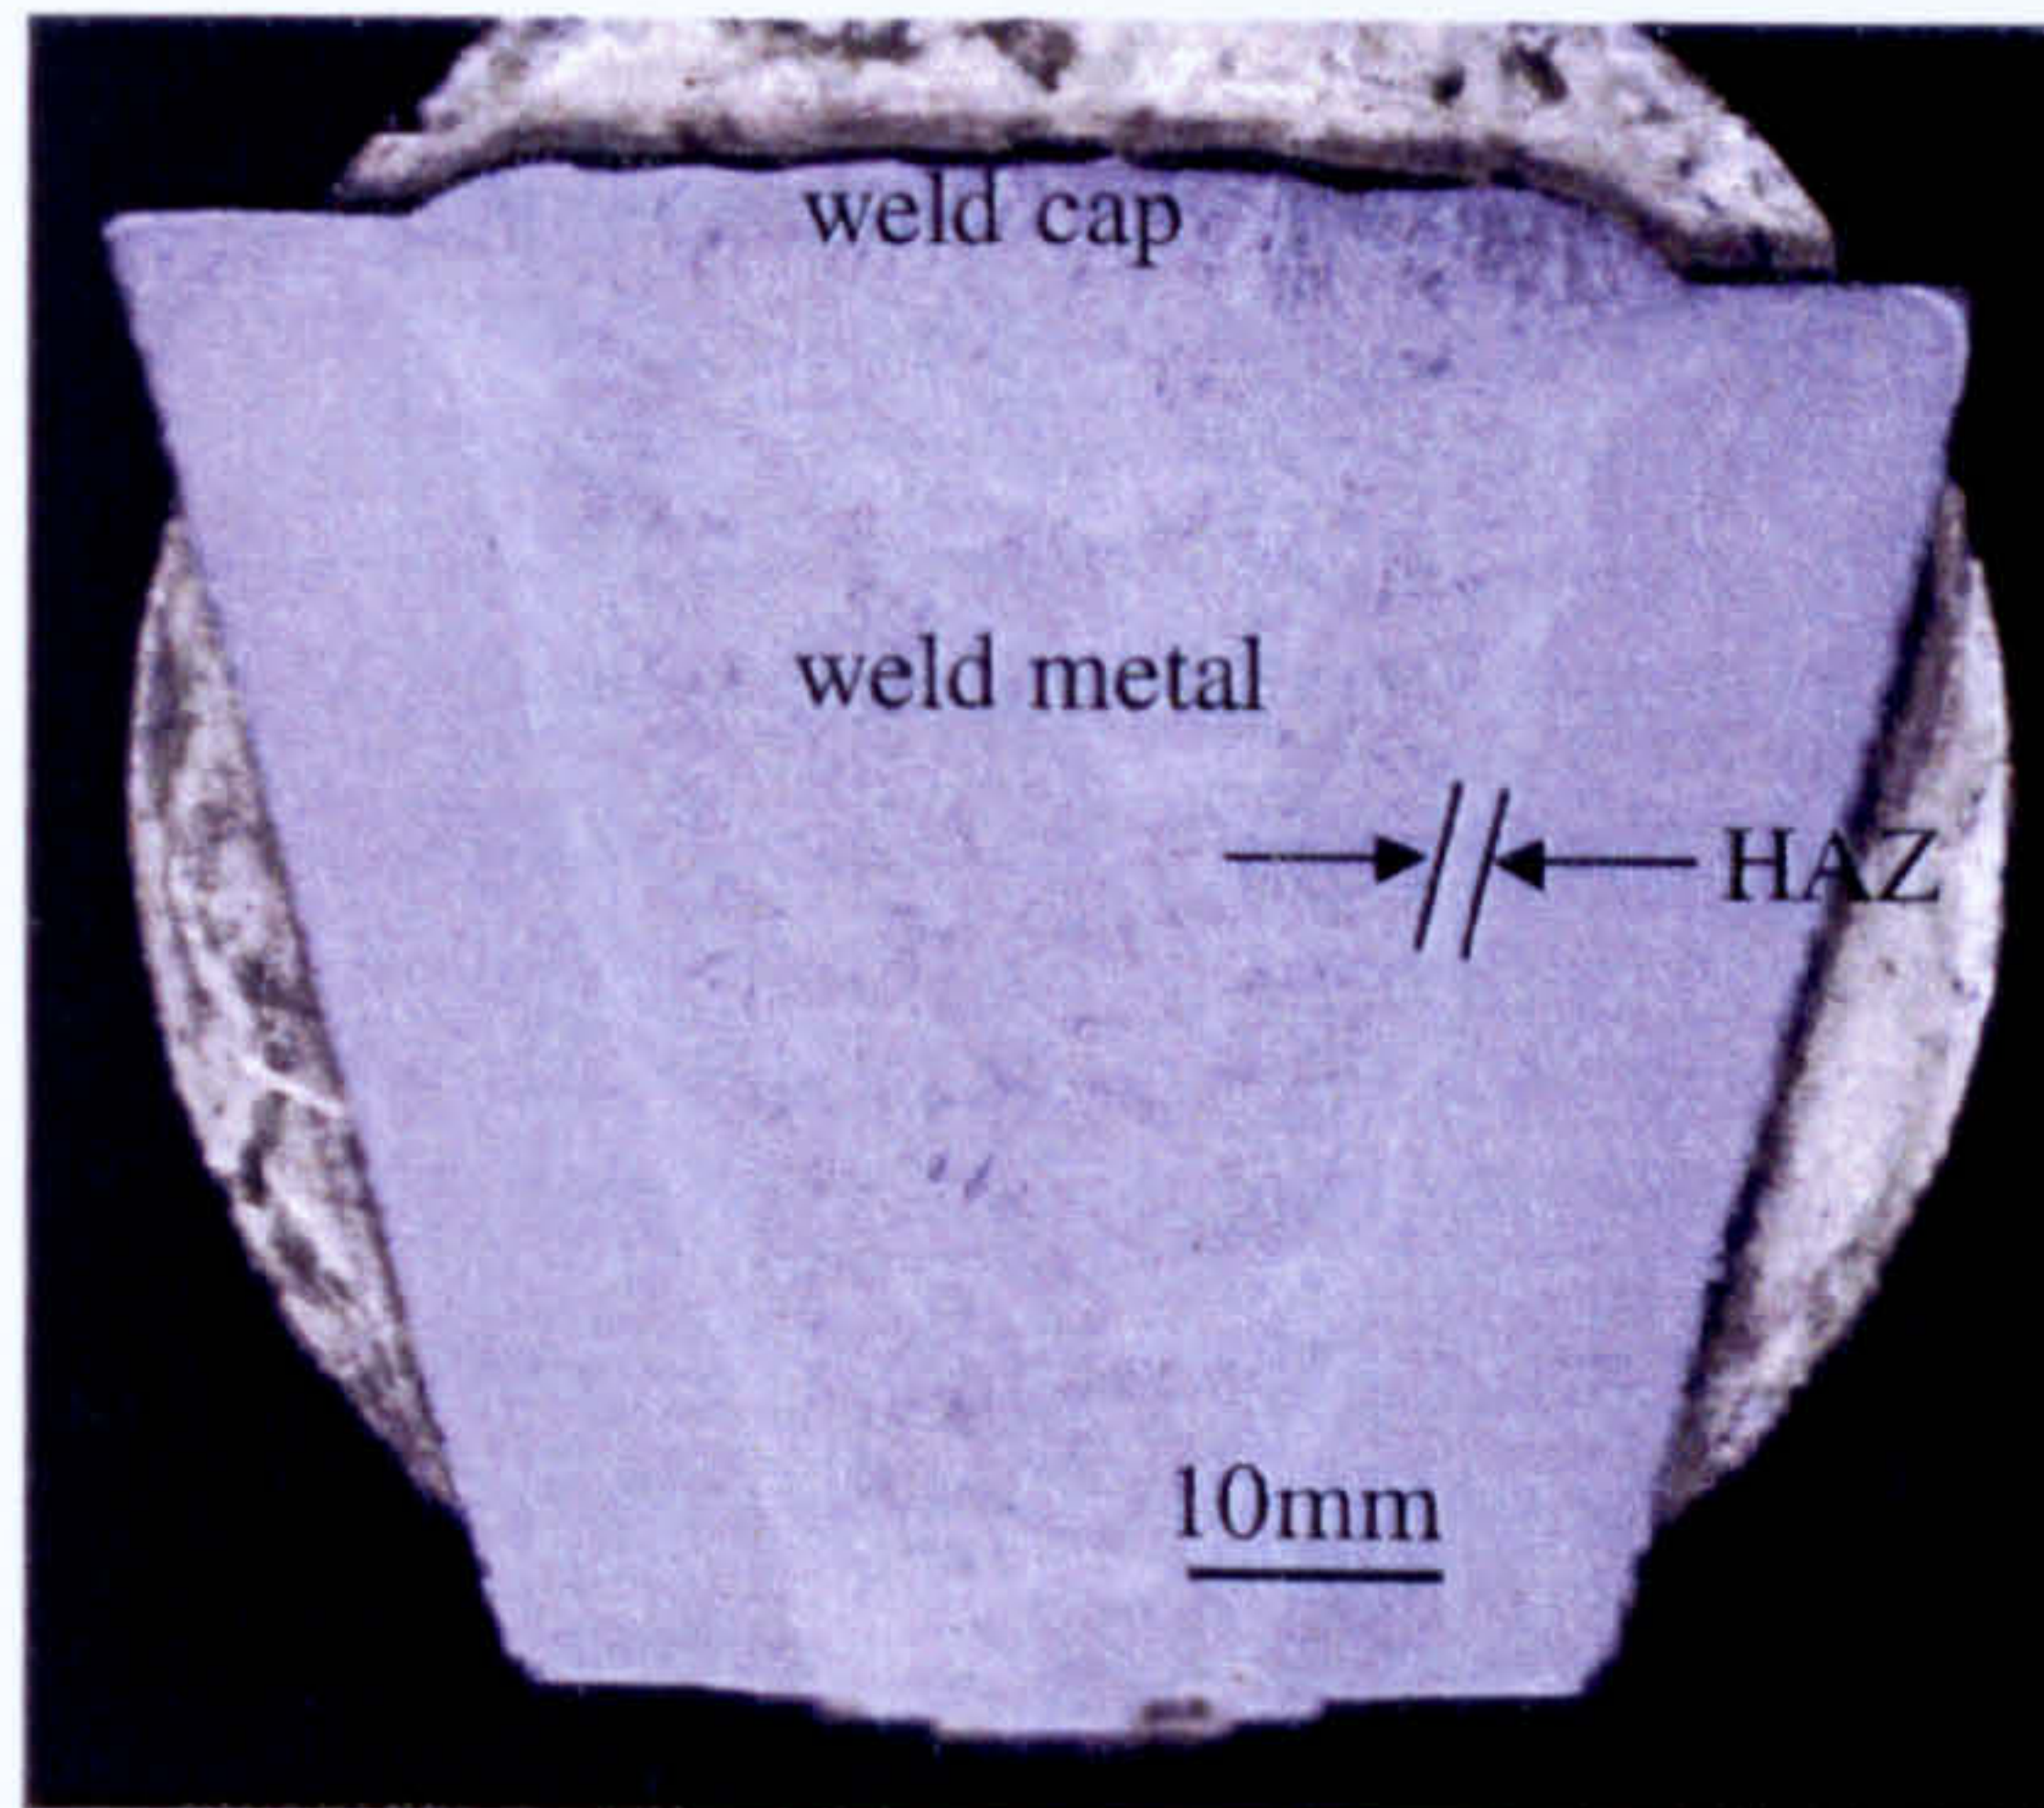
Macro-section of weld showing the heat affected zone and the height of the weld cap. Courtesy of Dr. Wei Sun, University of Nottingham.
